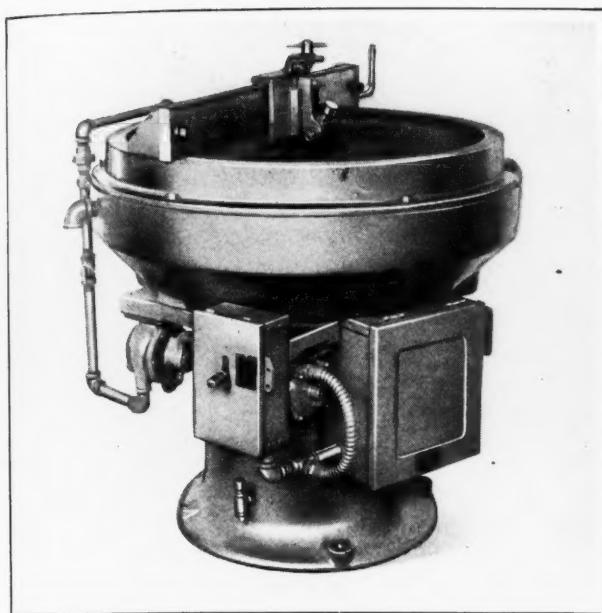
Another Motor-driven Vertical-spindle Disk Grinder
